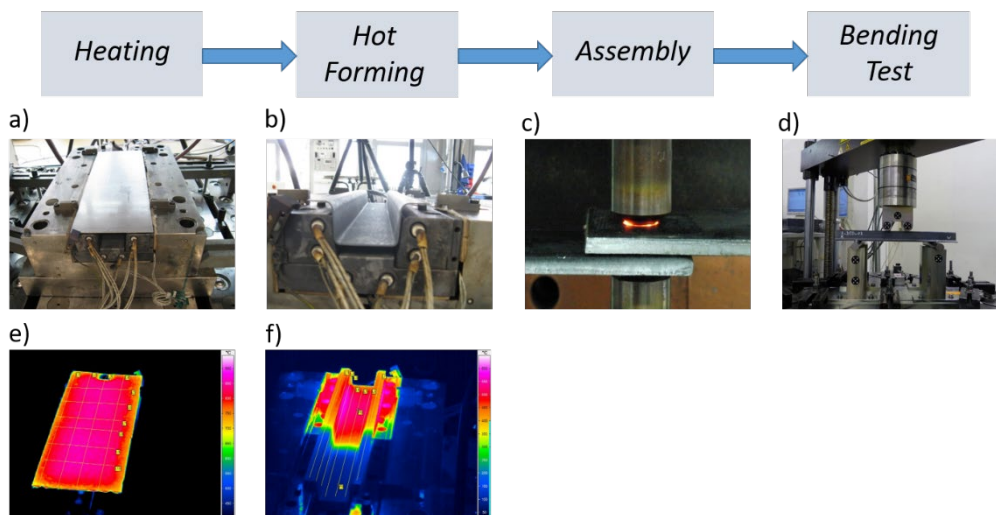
Hot metal forming manufacturing process chain of a 22MnB5 hat profile. After heating the metal sheet a), a hot forming step with partial cooling is performed b). A cover plate is joined to the hat profile by resistance spot welding c). Finally, a four-point bending test is done to evaluate the structural performance of the partially press hardened hat profile d). Images e) and f) show the temperature field after heating and after forming step.
